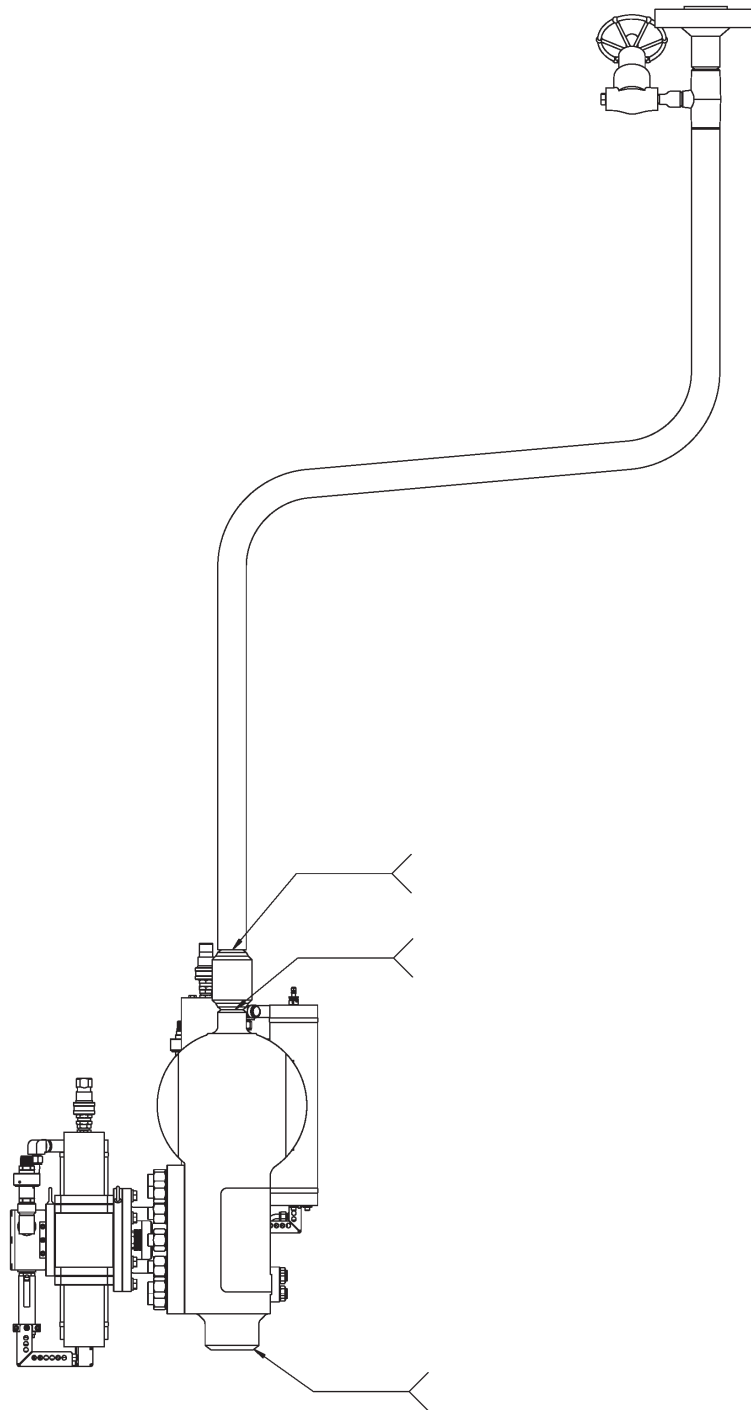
Feedwater line with containment penetration area welds indicated
